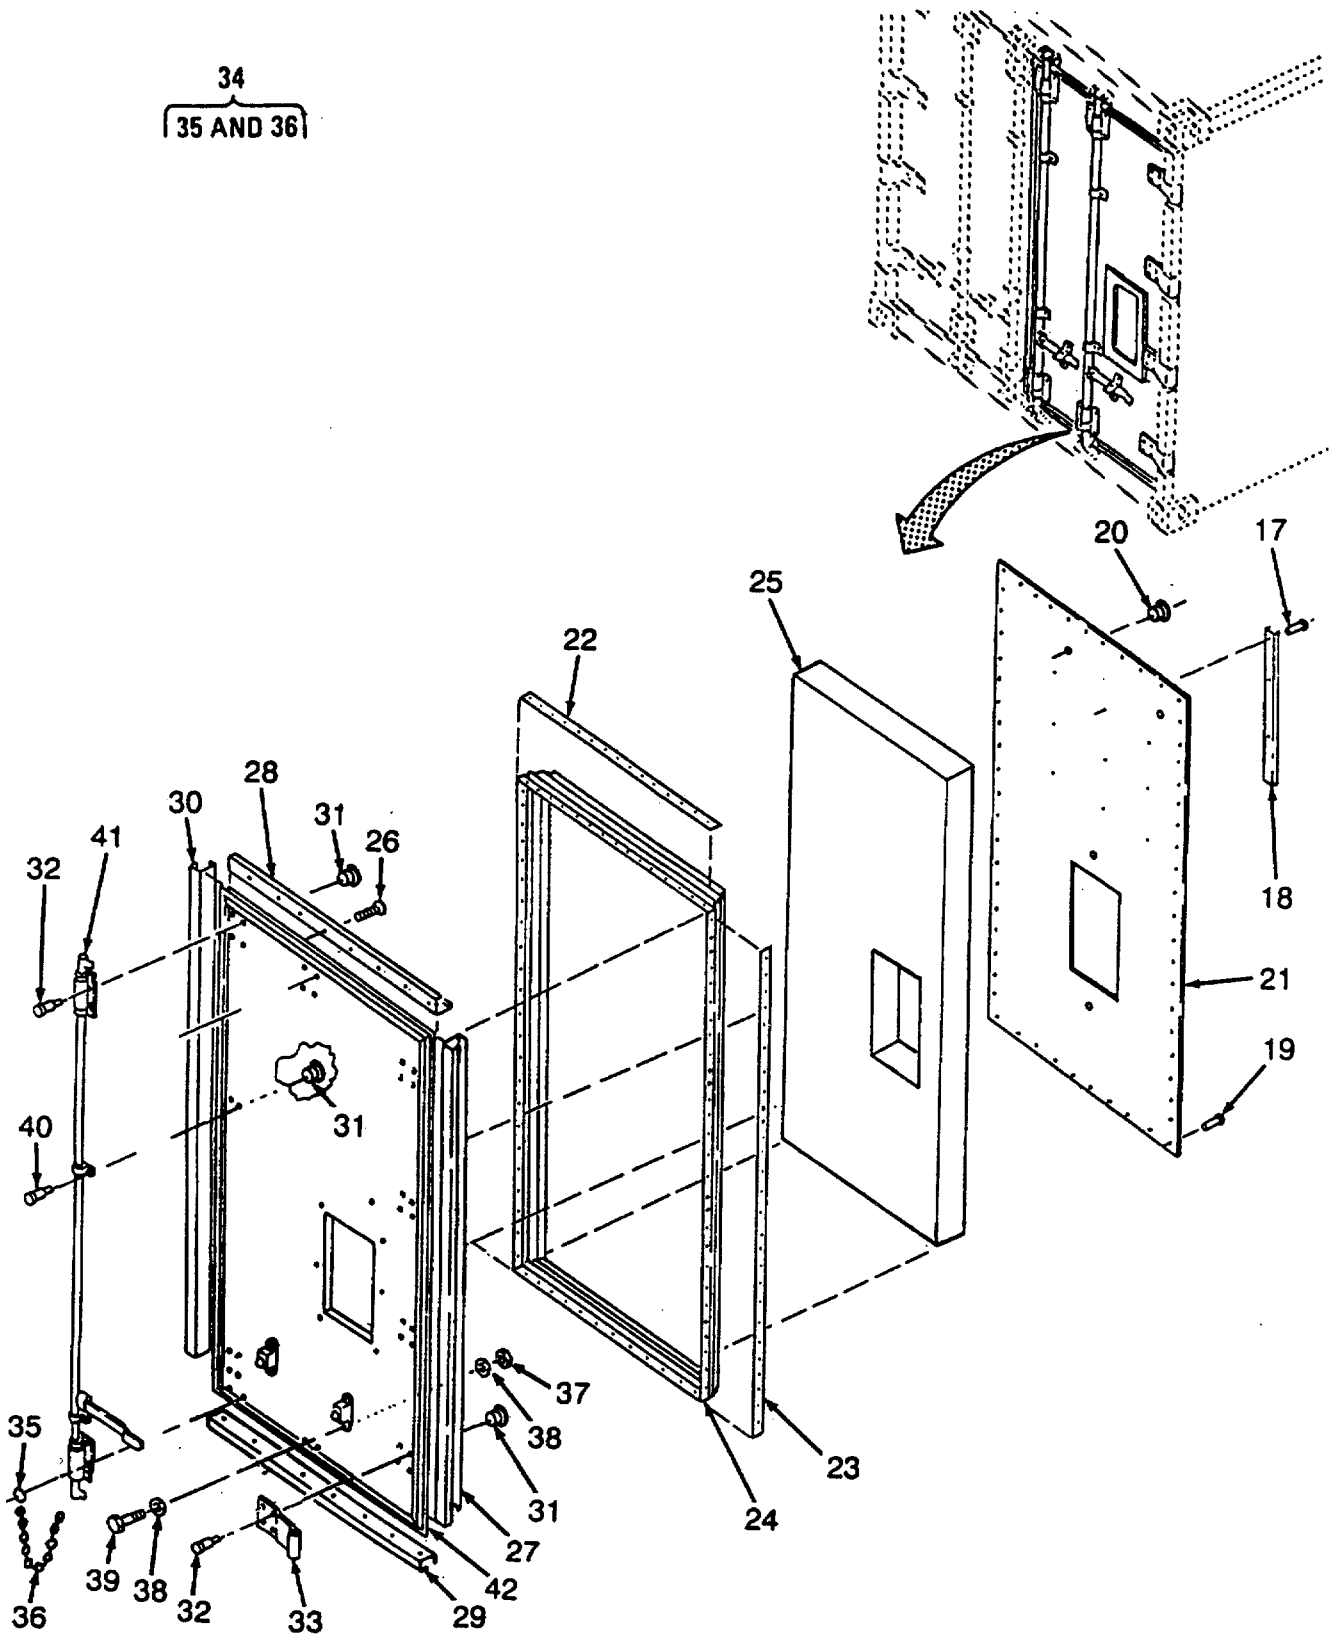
Right Hand Door Assembly (Sheet 2 of 2)
